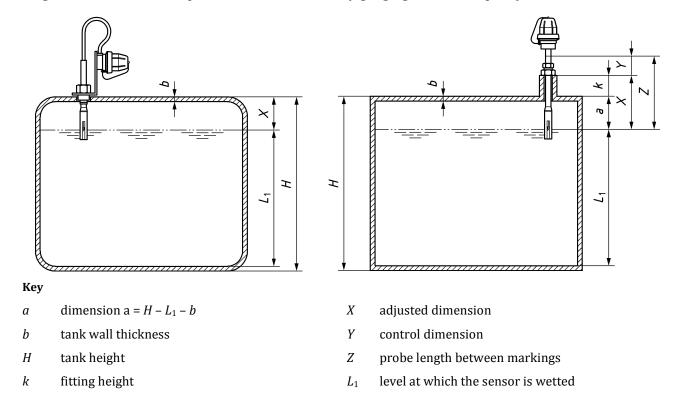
Relevant tank dimensions for the setting of the overfill prevention sensor
